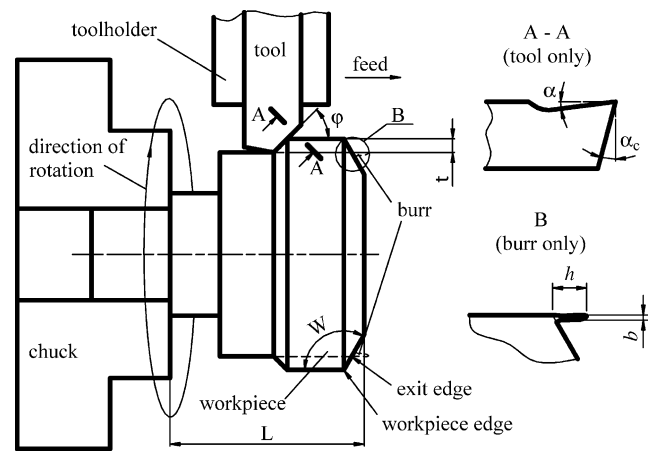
Experimental setup, tool geometry and final burr dimensions.
